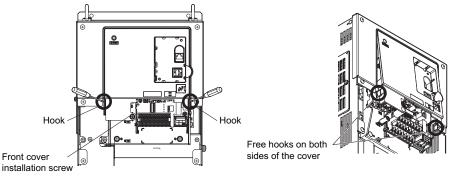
Remove the Front Cover (2A0035 to 2A0105, and 4A0035 to 4A0300)
